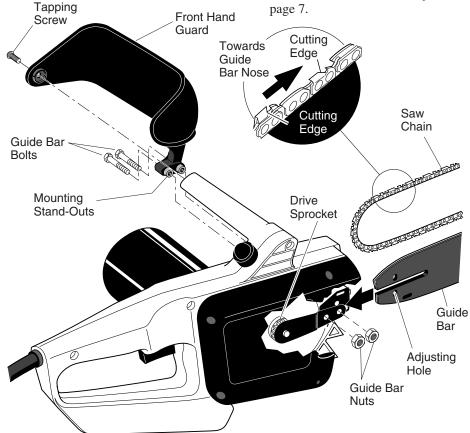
Assembling Guide Bar, Chain, and Hand Guard
